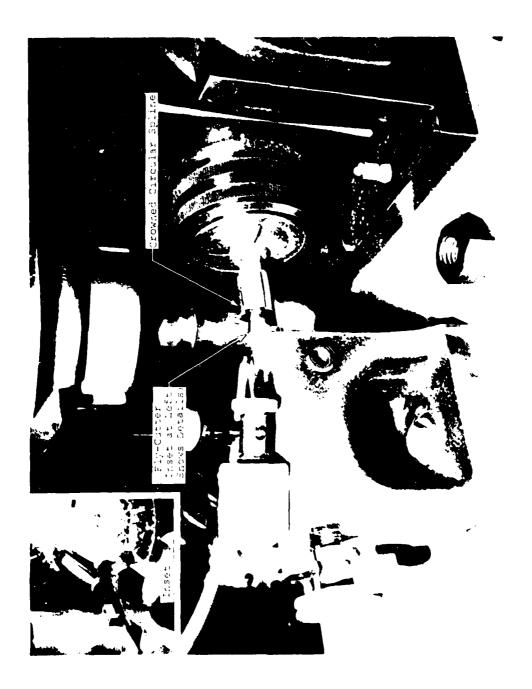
Milling Operation: Close-Up of Cutting Circular Splines on Drive Shaft Blank
